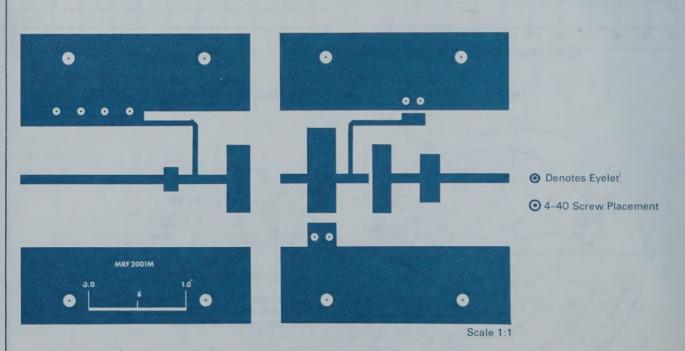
PRINTED CIRCUIT BOARD LAYOUT — 2.0 GHz TEST CIRCUIT
